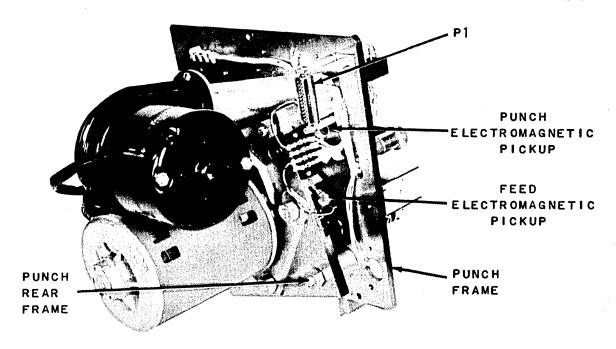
PUNCH HEAD, RIGHT REAR VIEW.
